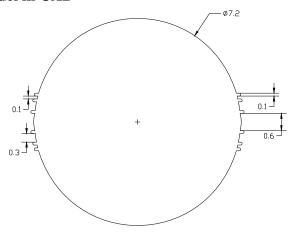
2D drawing of the cricket ball (All the dimensions are in cm)
